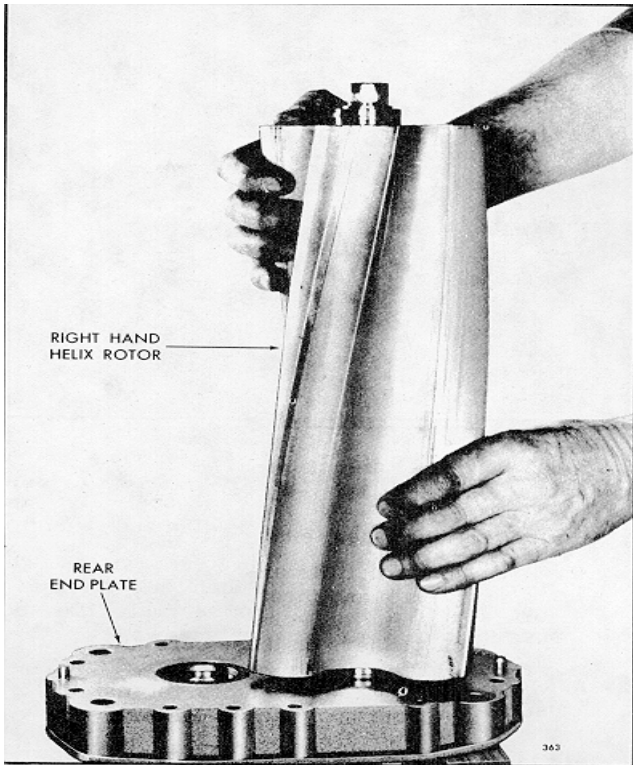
Installing Blower Rotor in Rear End Plate (Ring Type Oil Seals)
